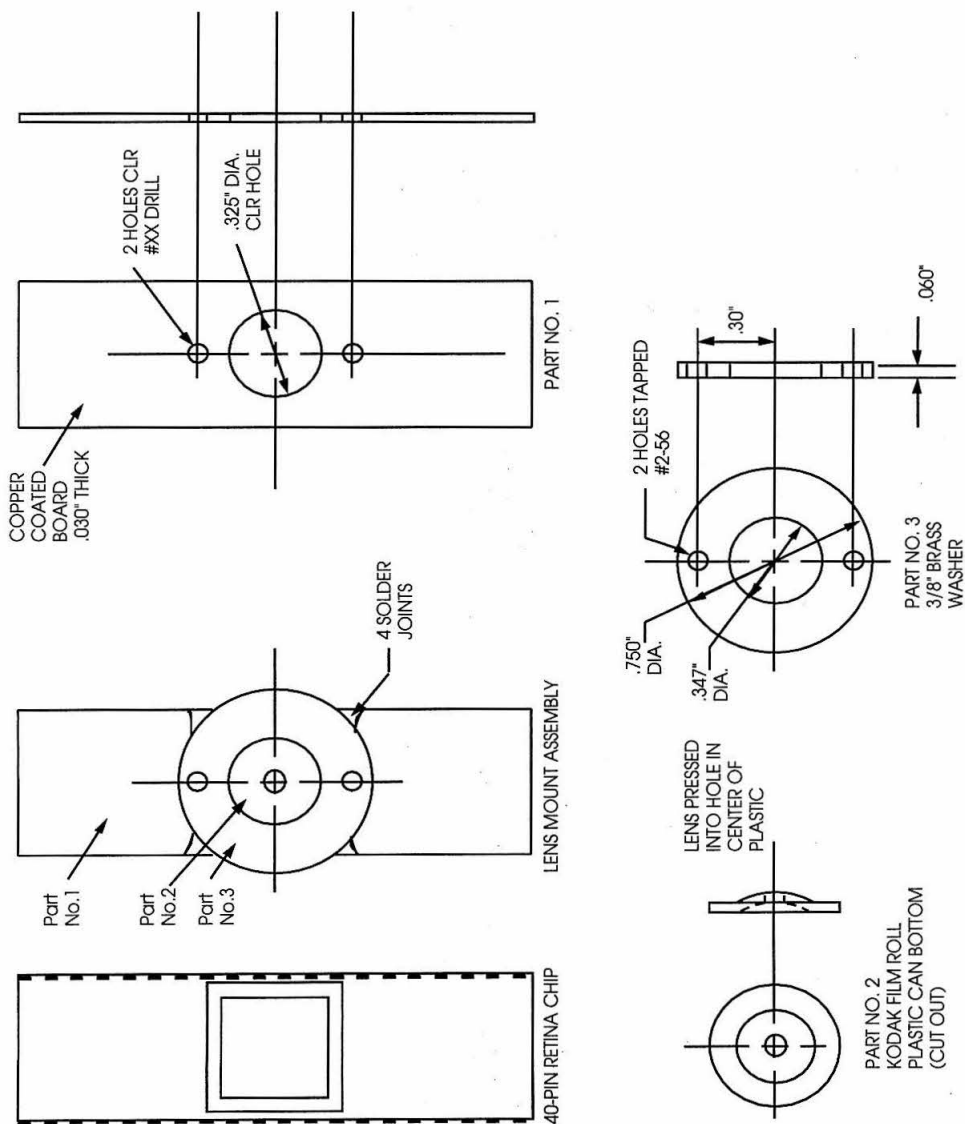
Mechanical drawing of the lens mount. Drawing by Brooks Bishoferger.
